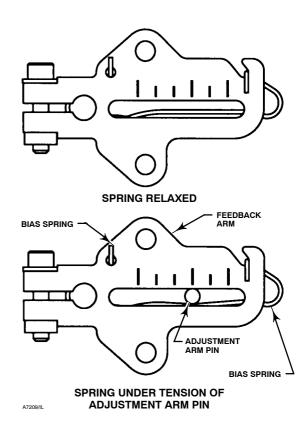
Locating Adjustment Arm Pin in Feedback Arm
